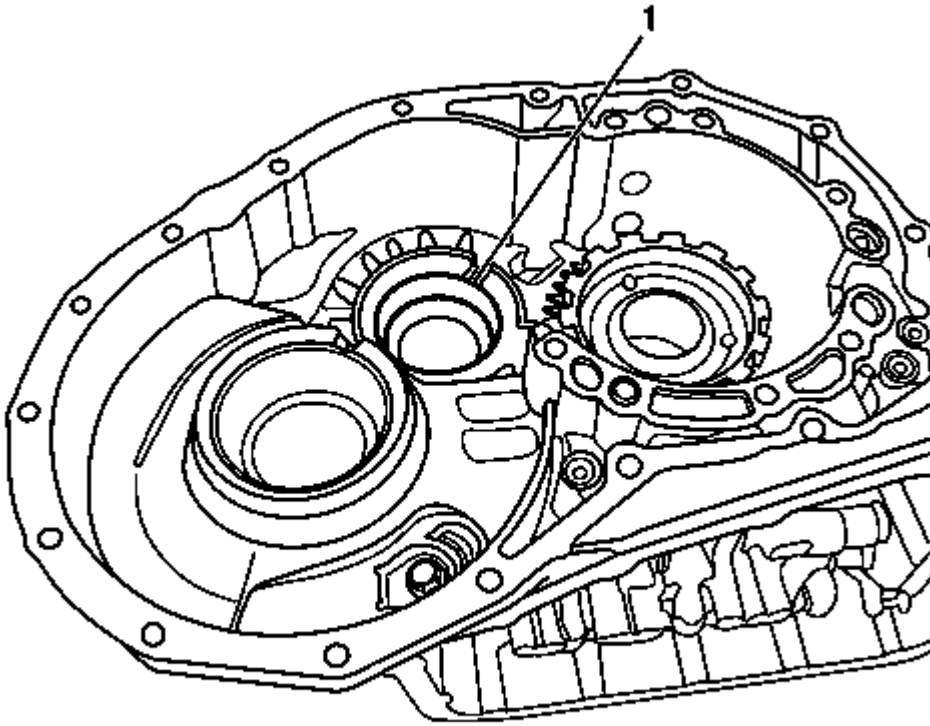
Counter Driven Gear Side Outer Tapered Roller Bearing Race
